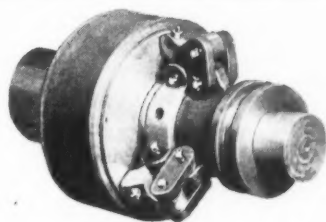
"Taperoll" Clutch, Designed for Smooth Engagement
